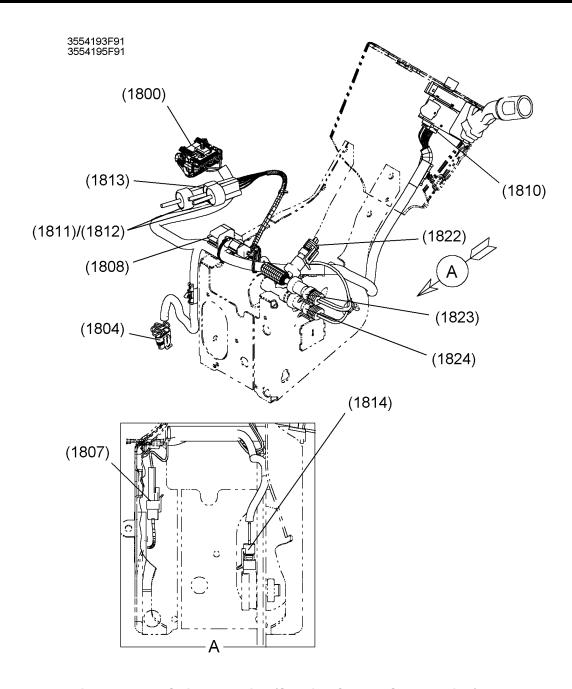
Air Park Brake Switch Location (Steering Column Support View)
